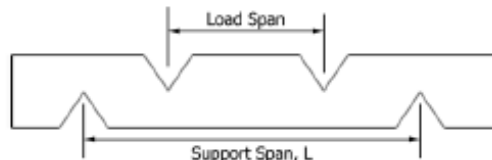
Fixture Used to Align Loading Noses and Supports
